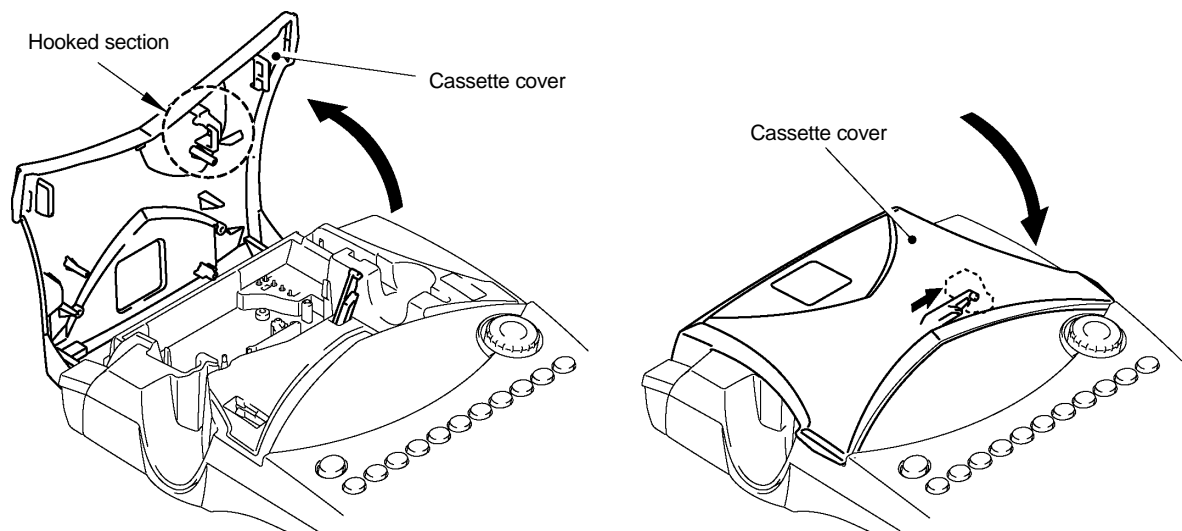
Roller Holder ASSY & Cassette Cover Interlocking Mechanism
